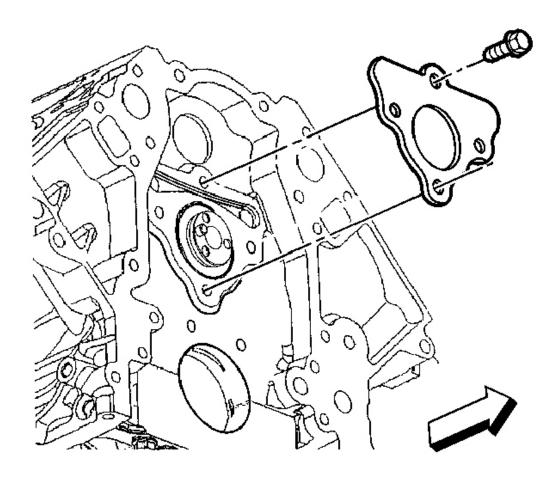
View Of Camshaft Retainer Plate Courtesy of GENERAL MOTORS CORP.
